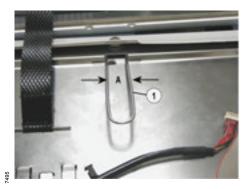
Detail view of operator control unit: Locking spring (lock position)
